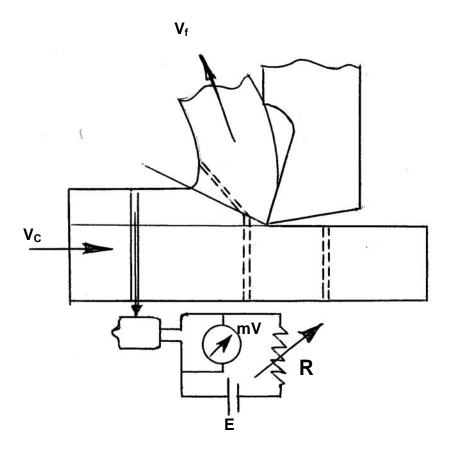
Measuring temperature at shear plane and tool flank by photocell technique
